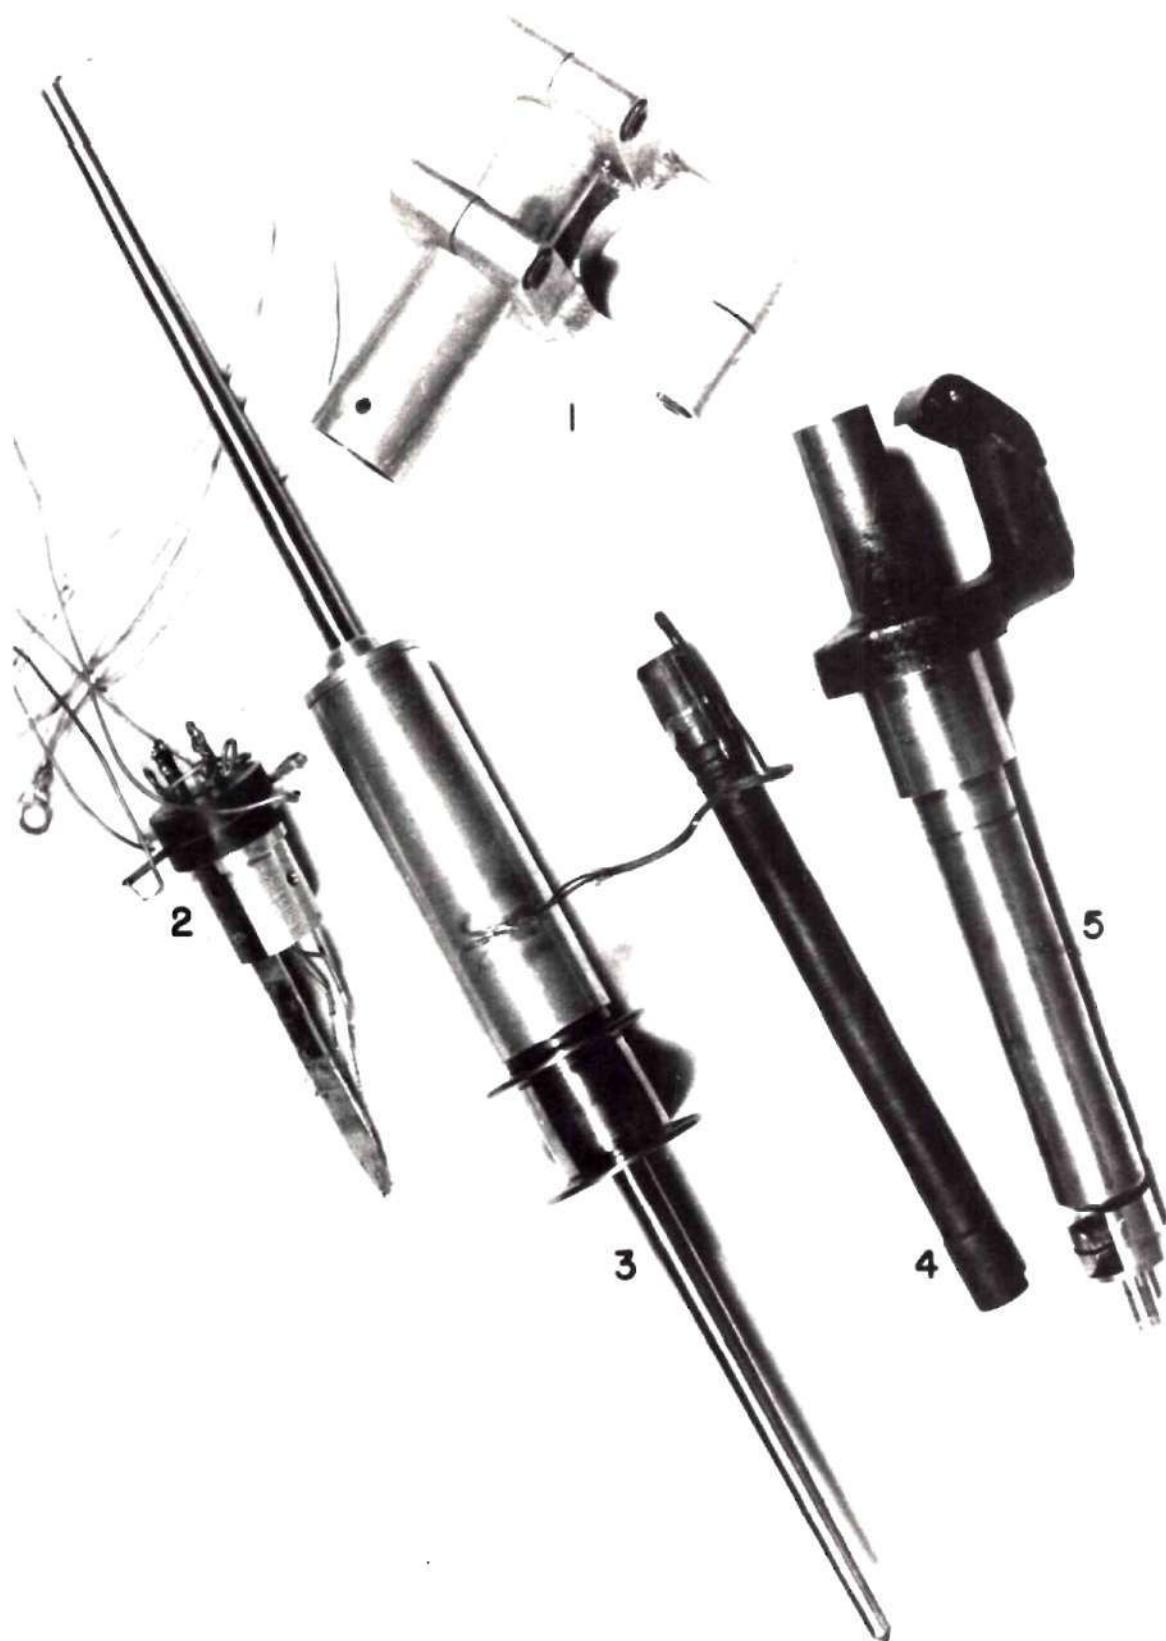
Spindle Dynamometer, Component Parts of the Spindle and the Friction Force Pickup
